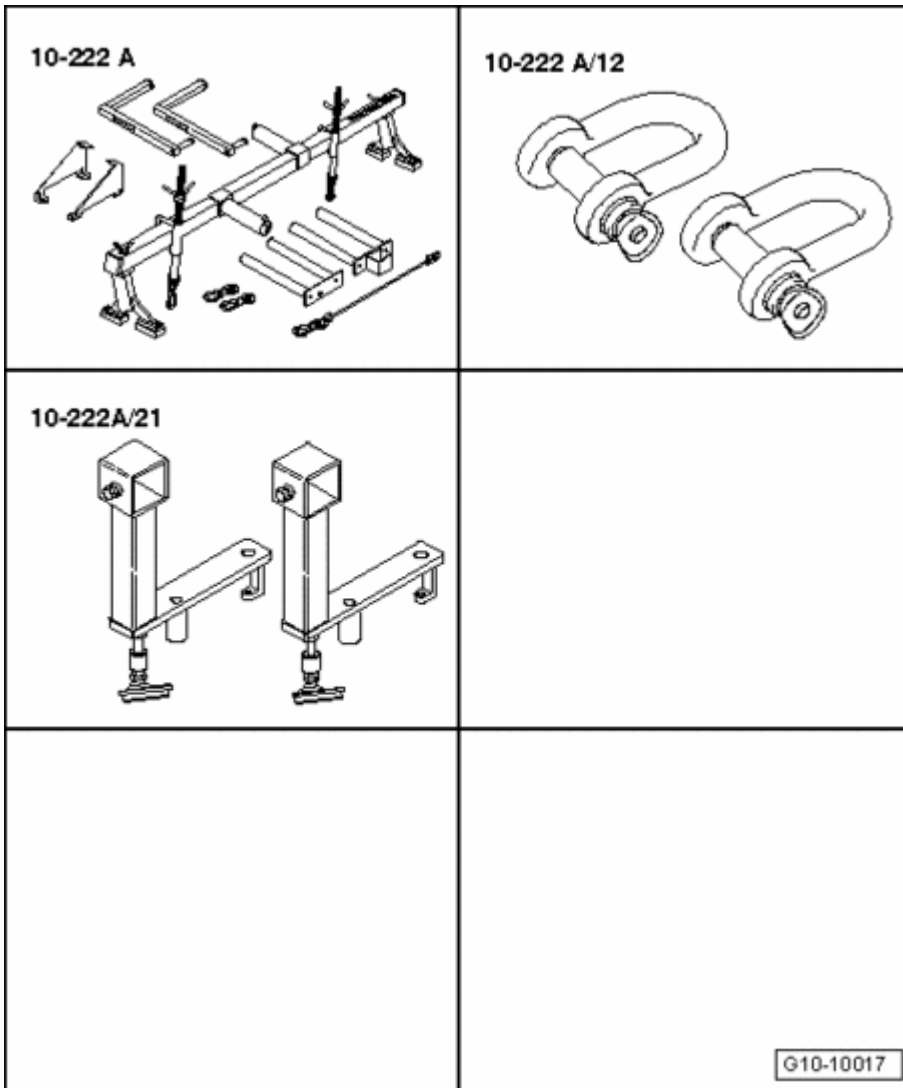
Identifying Special Tools - Left And Right Engine Mounts, Removing And Installing
